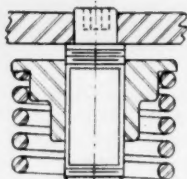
Cross-sectional sketch showing use of threaded plug for centering a compression spring.
